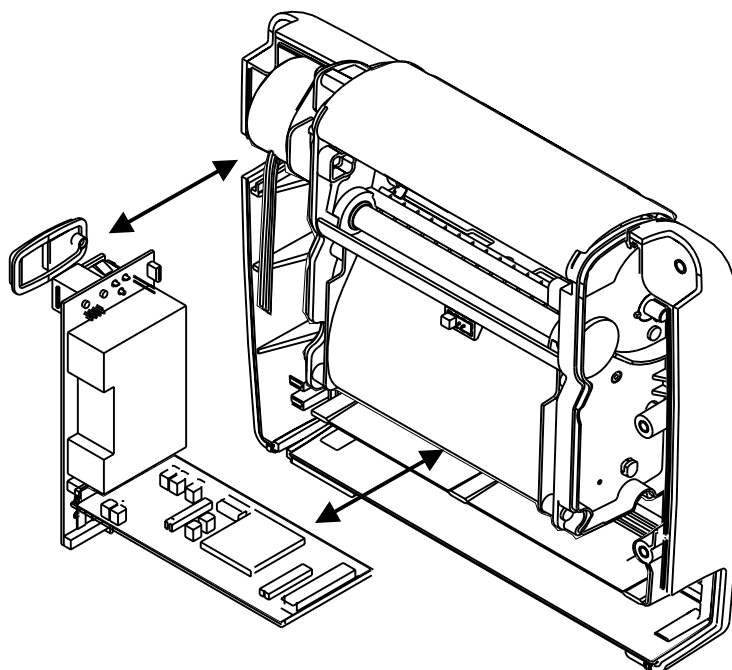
Remove/Install Power Supply Board and Main Logic Board
